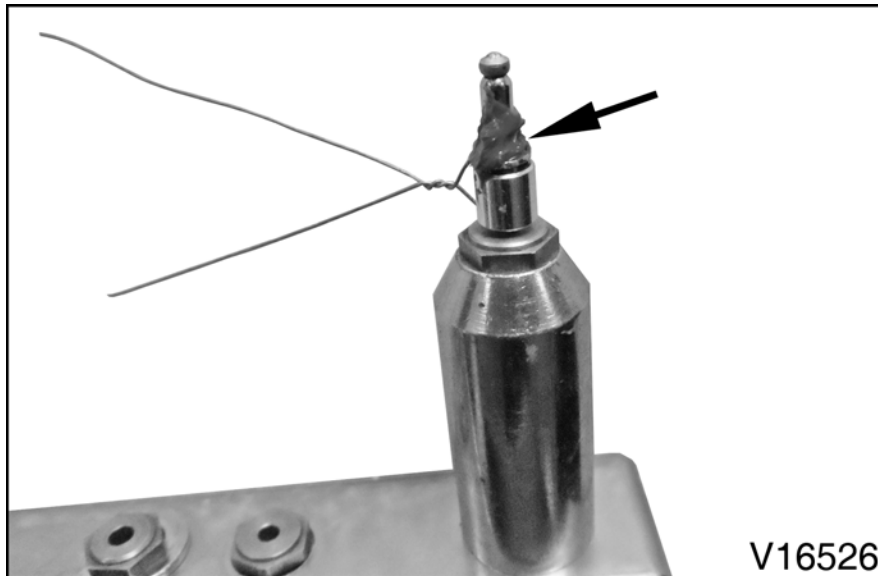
Rivet/Spacer Assembly Positioned in the Rivet Gun
